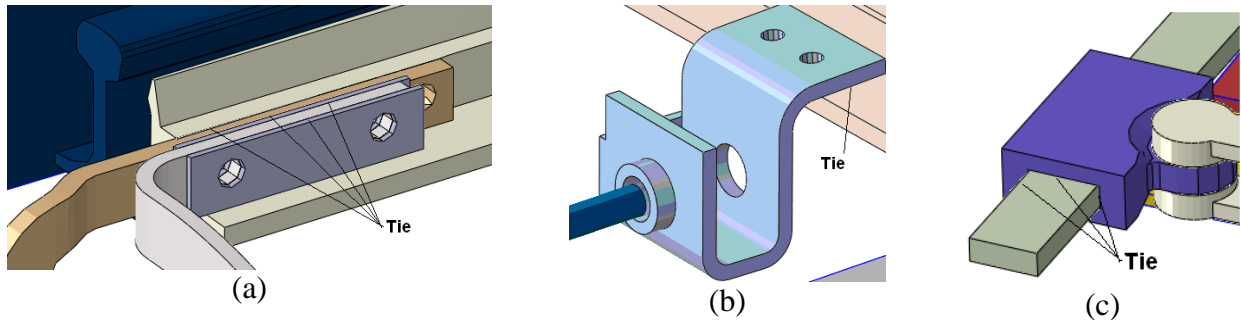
Tie constraints; (a) Insulating jacket, switch extension piece, lock stretcher bar and switch blade; (b) Stretcher bar bracket and switch blade foot; (c) Sleeve and crank
